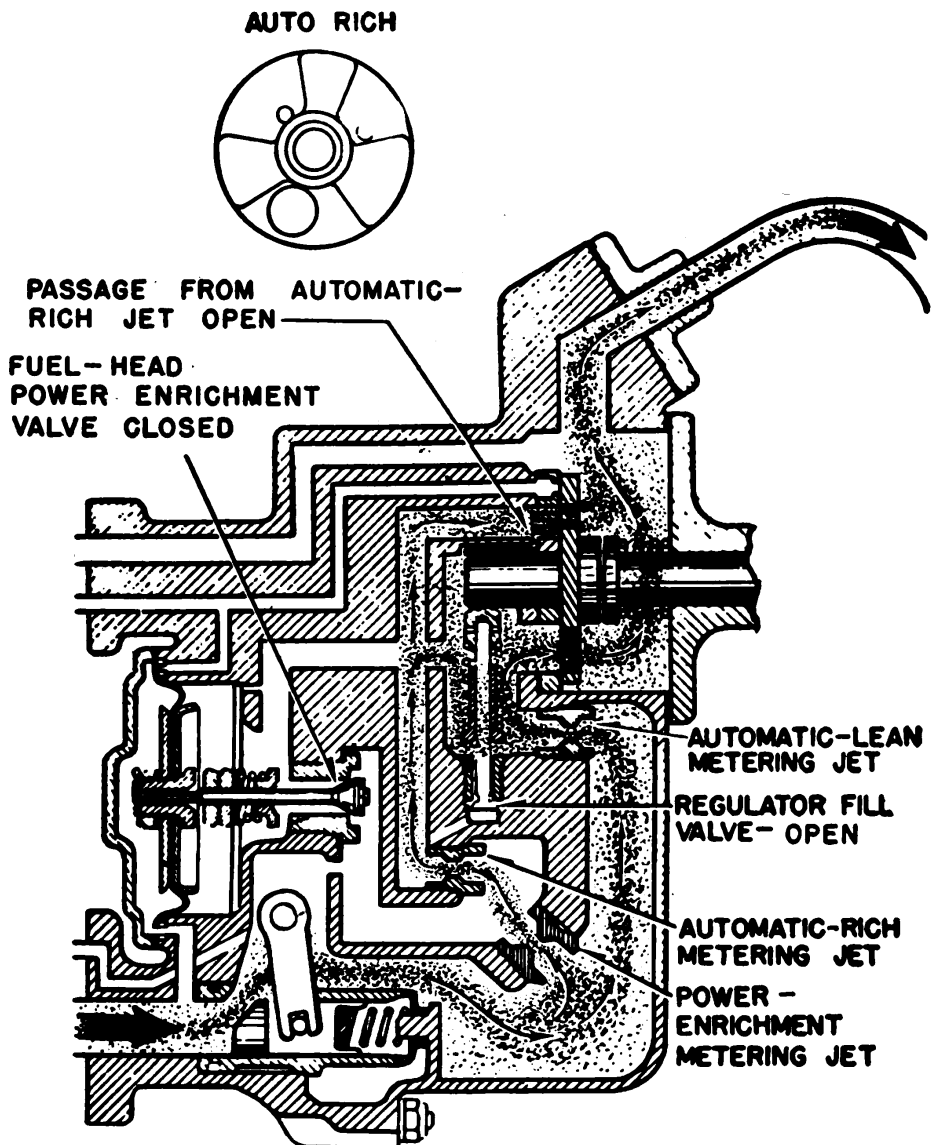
Stromberg injection carburetor in automatic-rich position—power enrichment valve closed.
